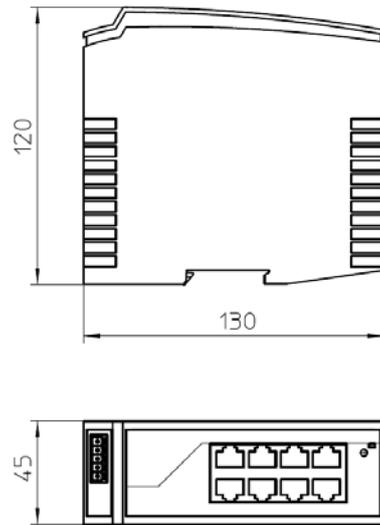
Dimensions of 5/8-port versions in a narrow housing
